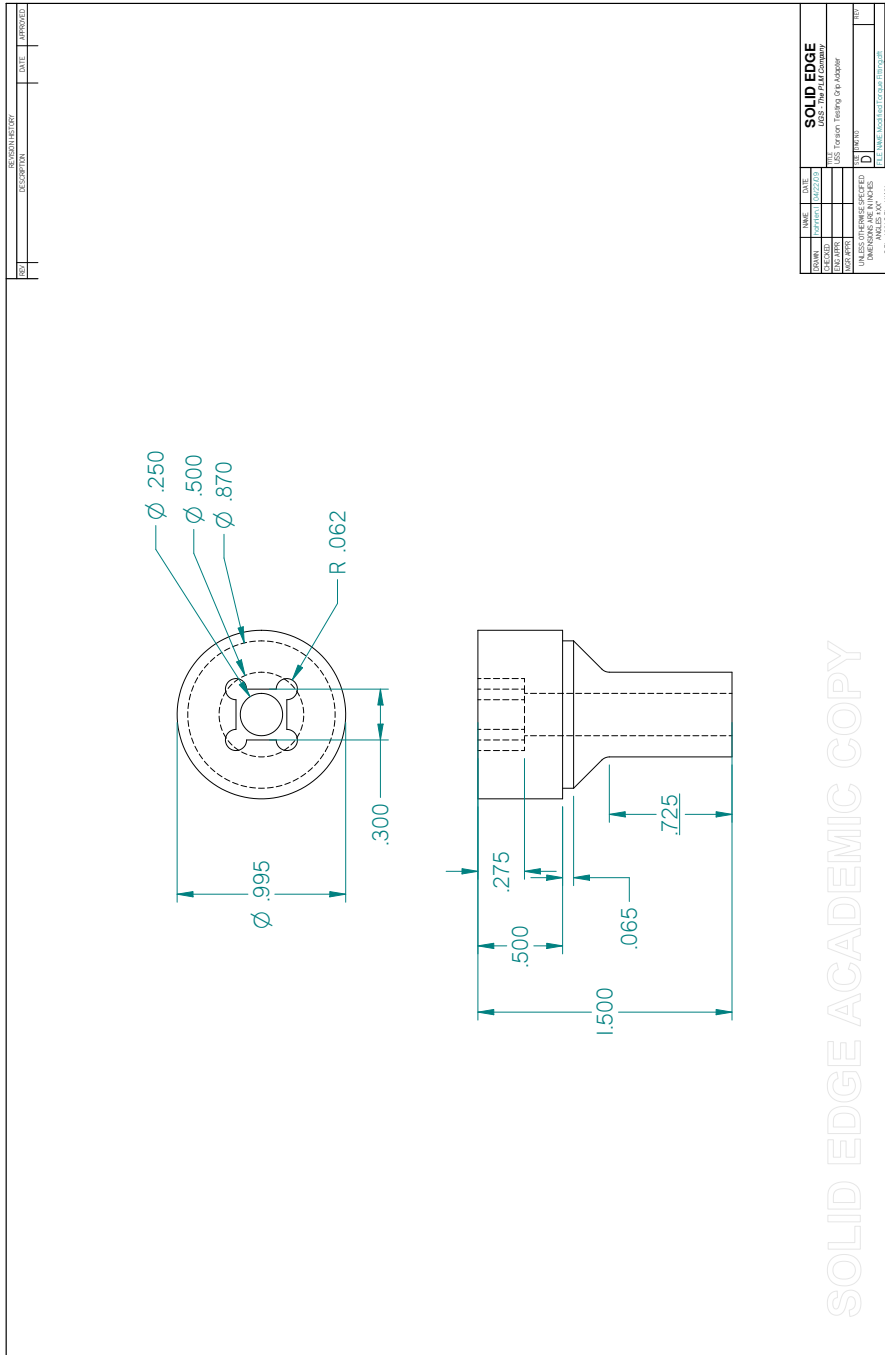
Shear testing jig, insert used to ensure proper fit of shear sample. All dimensions in inches.
